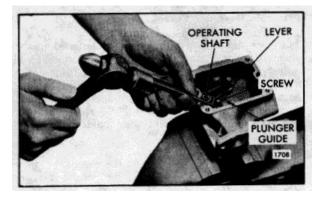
Removing Variable Speed Spring Plunger Guide
